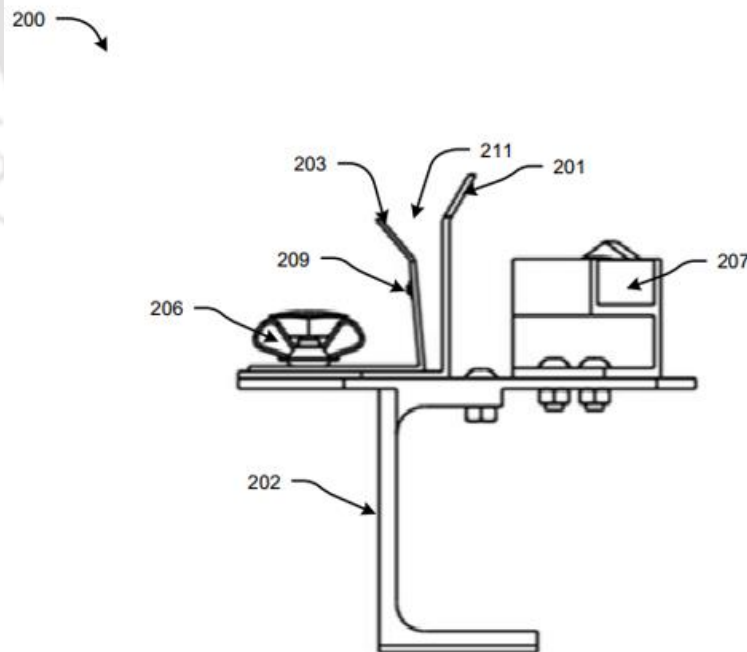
Cutting and slide assembly (part details). (Source: author)
